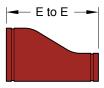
Fabricated Eccentric Reducer (Segment Welded)
